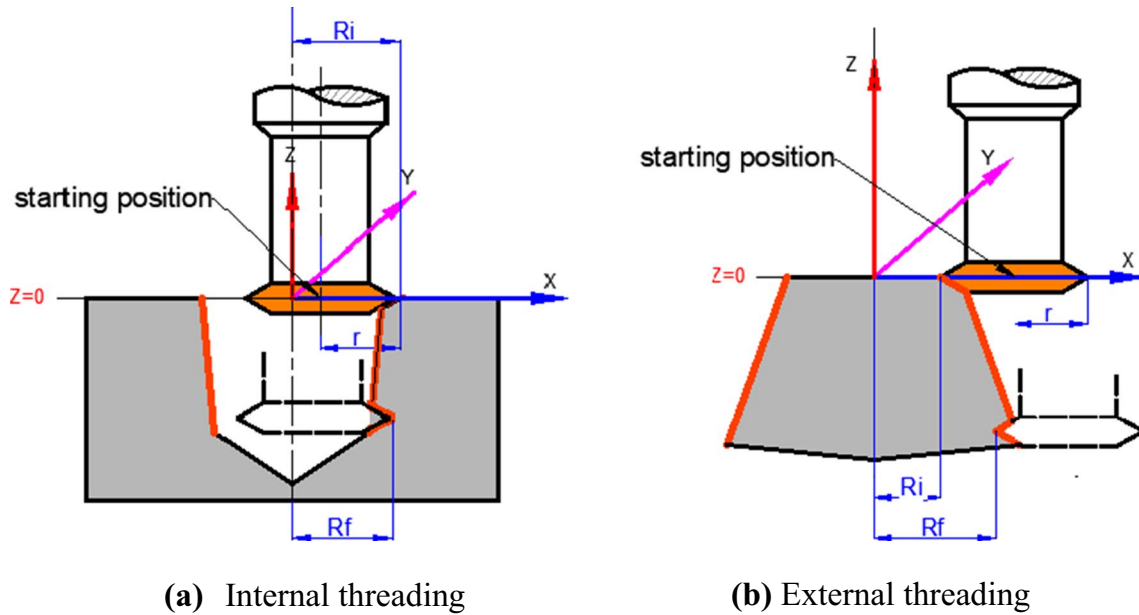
Thread milling – Case: variable radius (a) Internal threading (b) External threading
